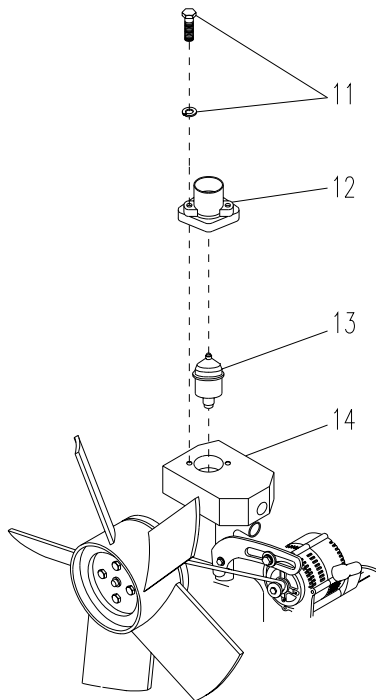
Diesel Engine (Sheet 4 of 11)
